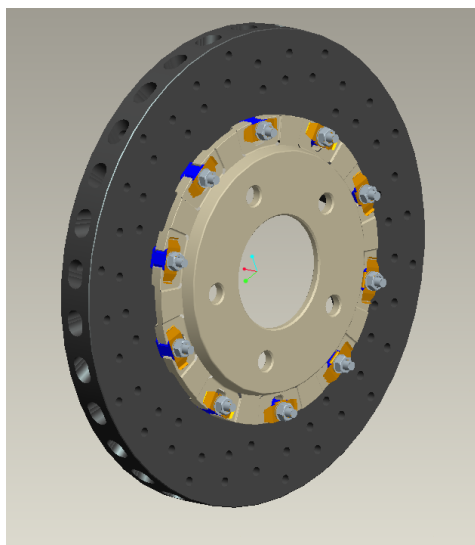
CAD render of the BAC Mono CSiC Brake Disc Assembly
